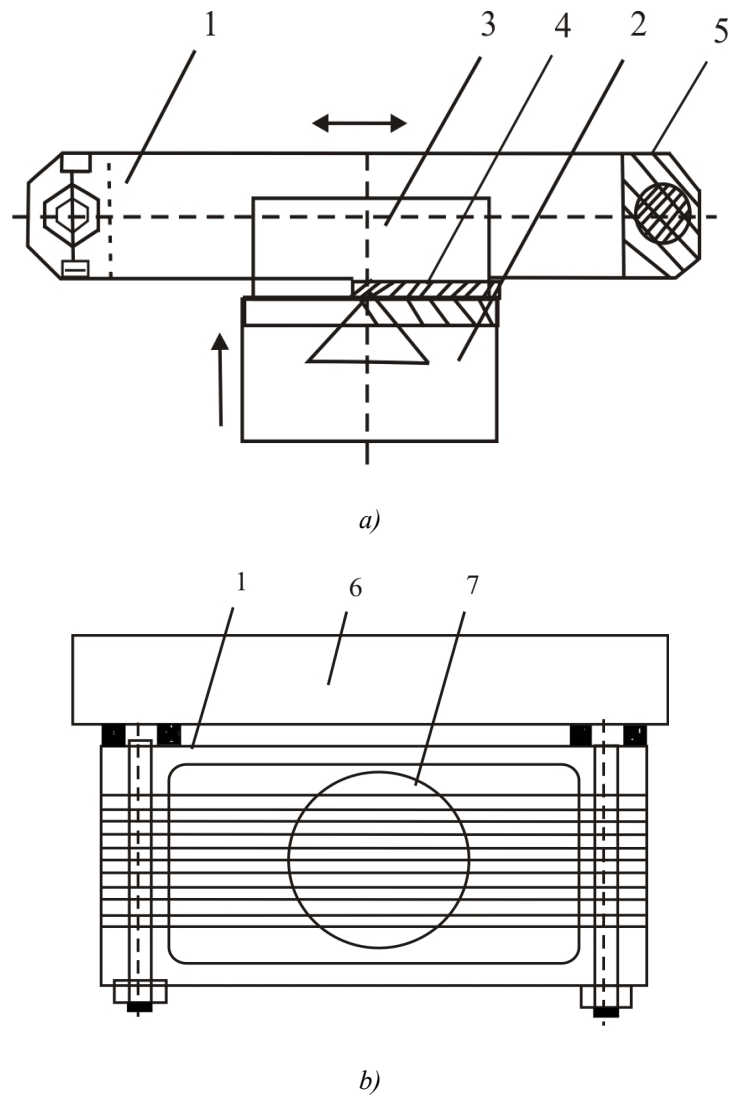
Cutting by diamond disc with the inner cutting blade:
